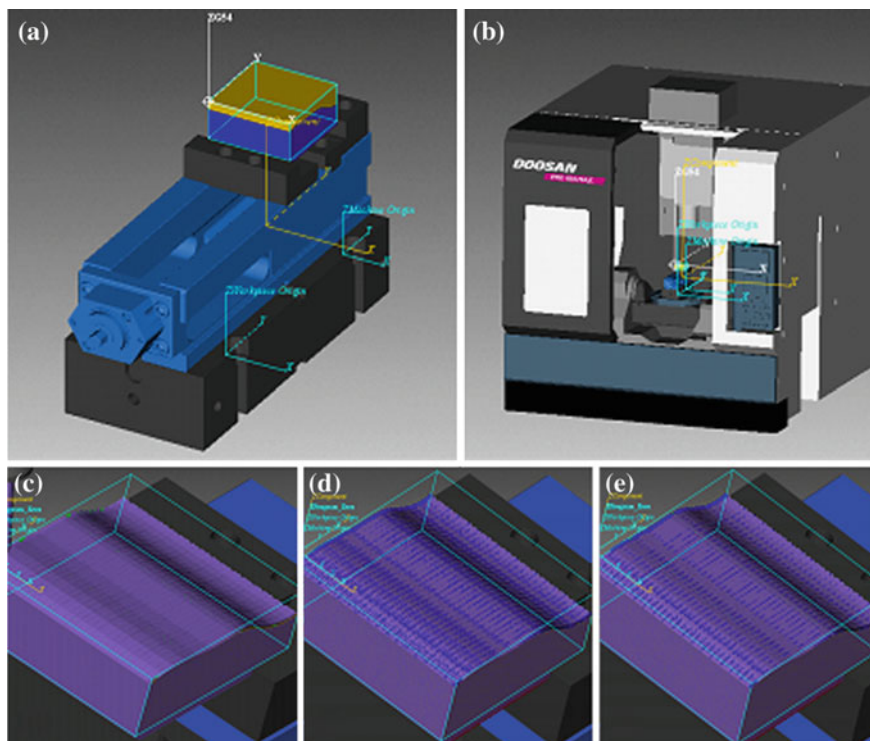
Virtual machining of the 5-axis test part: a machining set-up; b virtual CNC machine tool used; c resulting part surface error via manual CNC programming; d resulting part surface error via the application of conventional GA; e resulting parts surface error via the application of virus-evolutionary genetic algorithm
